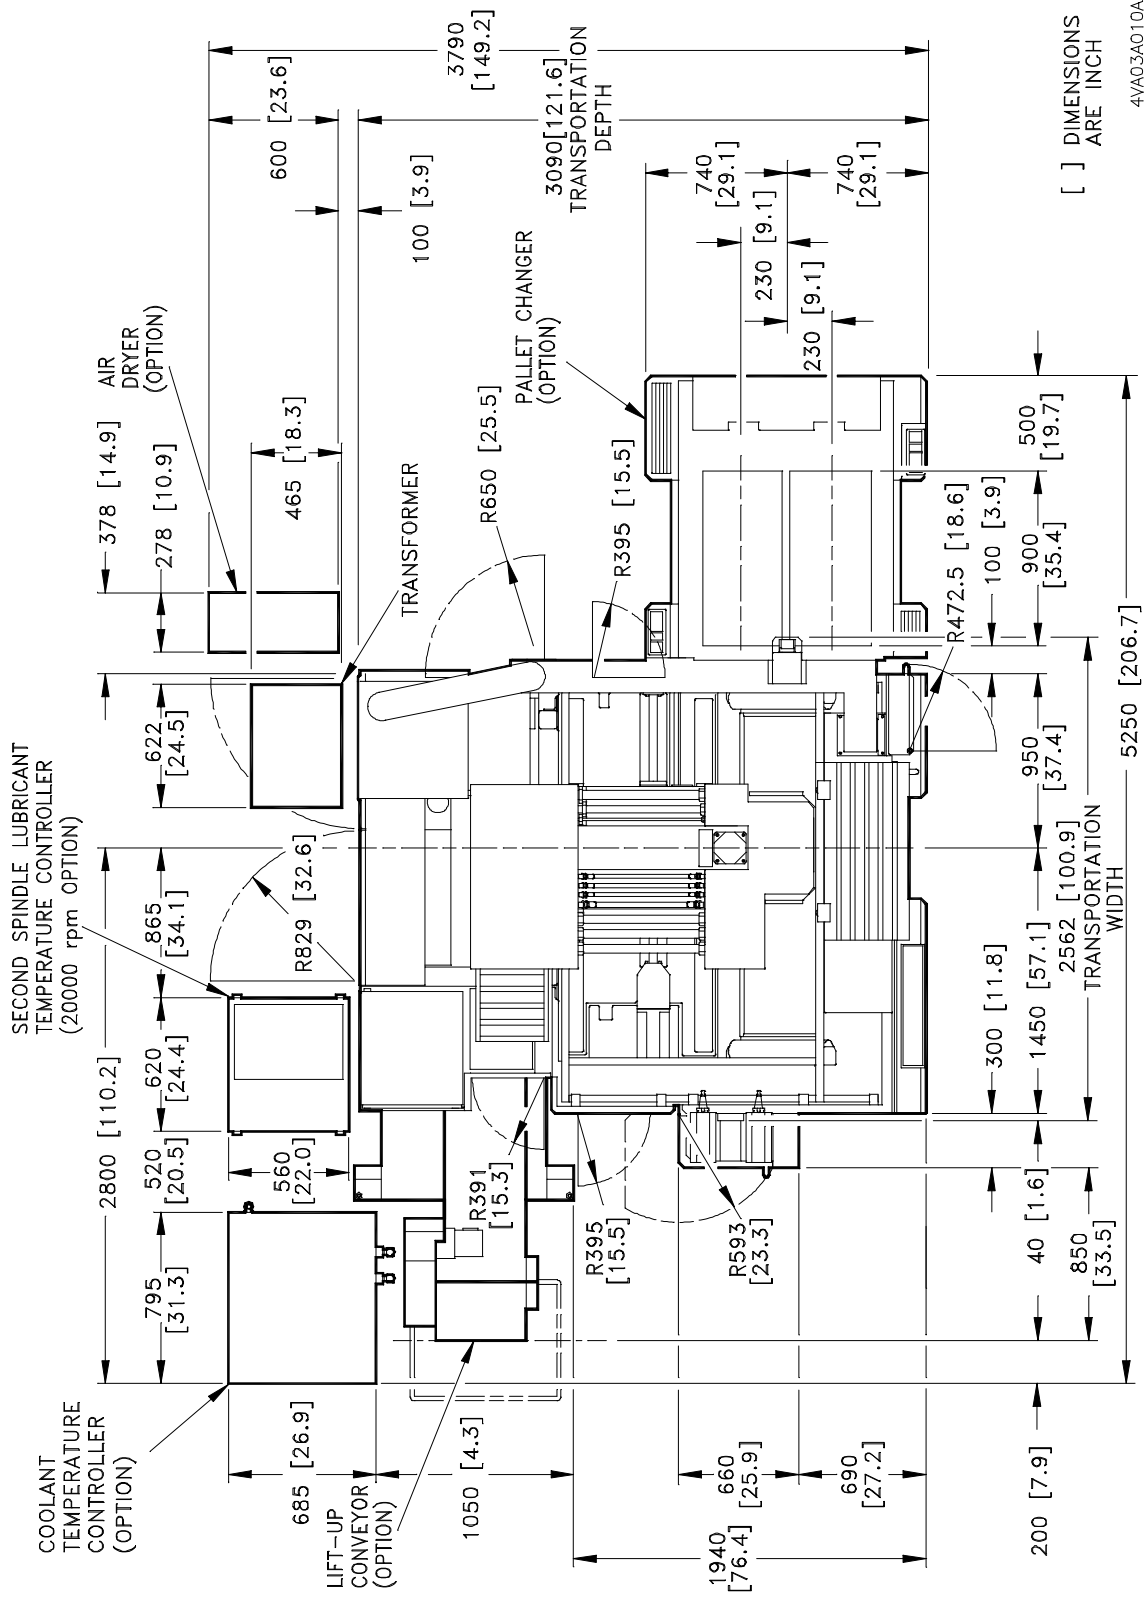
V55 WITH 40 OR 80-TOOL ATC, LIFT-UP CHIP CONVEYOR (LEFT), AND APC
